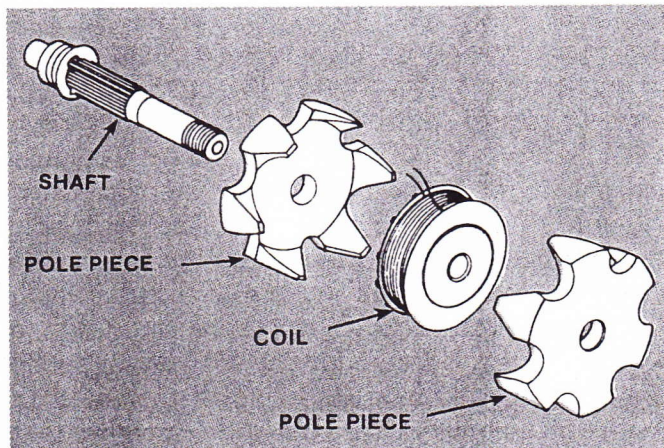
The rotor is made up of a coil, pole pieces, and a shaft.
